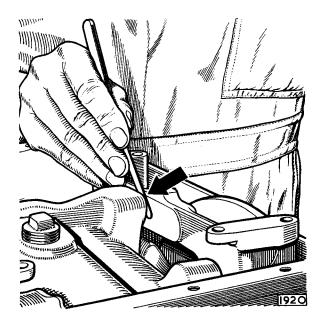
Measuring the clearance between the inner fulcrum mounting bracket and the differential casing
